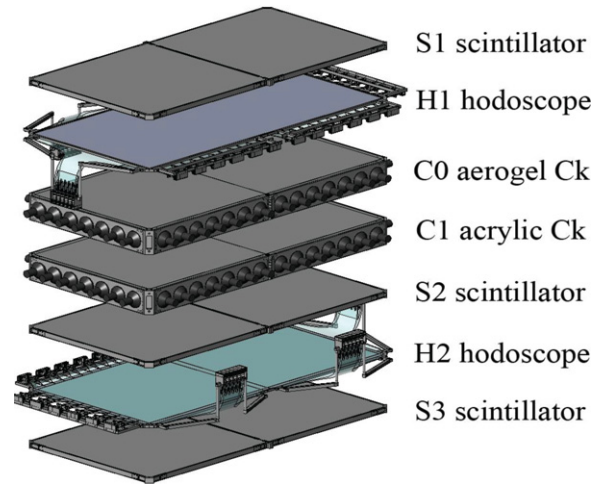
Drawing of SuperTIGER showing the two modules.
